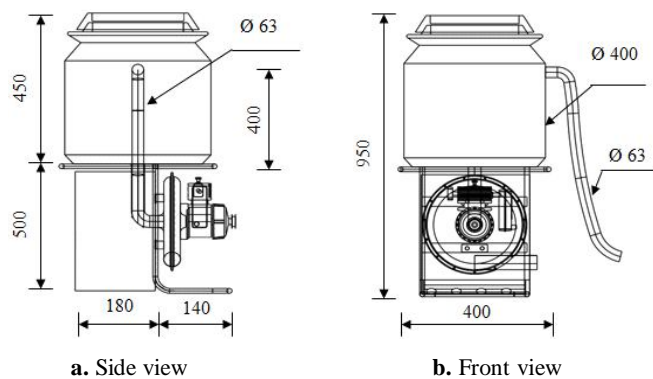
Detailed drawing of modified knapsack cotton picker. All dimensions are in mm.
